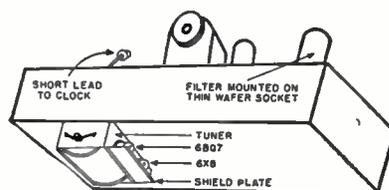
(Above). Chassis must be removed for simple tests on the tubes in the inaccessible front end of this receiver.
